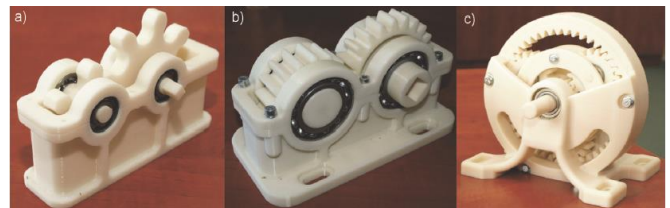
Gearbox with parts fabricated by 3D printing [4]
